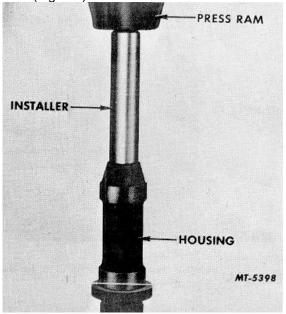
Pressing Lower Bushing into Housing Using Installer SE-1955-8
